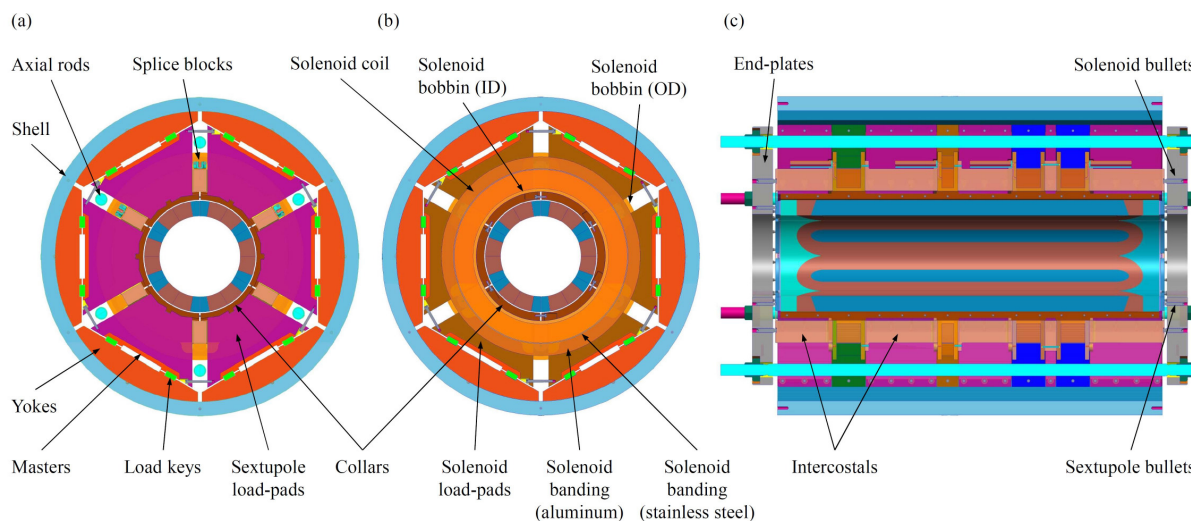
Cross-section of the assembled magnet: (a) in the section of the magnet between solenoids; (b) in the section of the magnet in the middle of a solenoid coil; (c) vertical cross-section along the magnet length.
